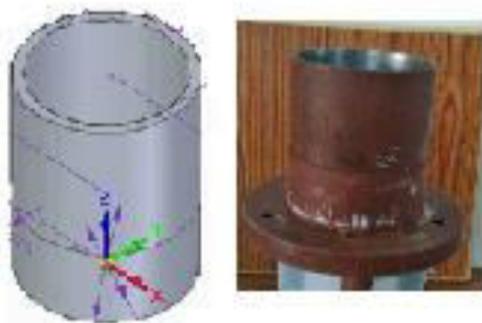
Pouring basin or Cylindrical Hopper for Matrix material entering into mold cavity Compression Cum Extruder Die Type Equipment
